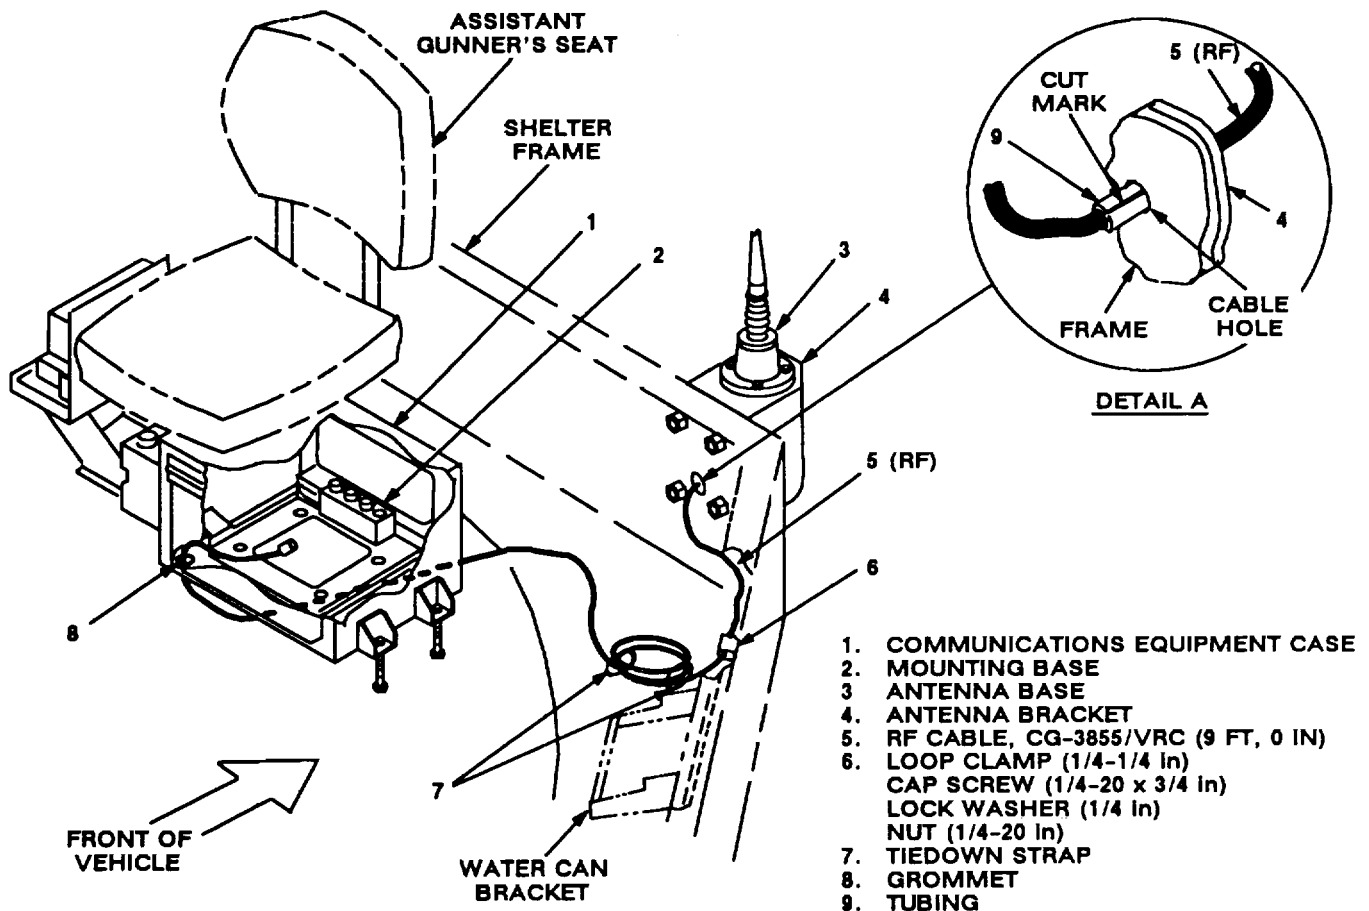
RF Cable Installation for Crew Personnel Shelter
